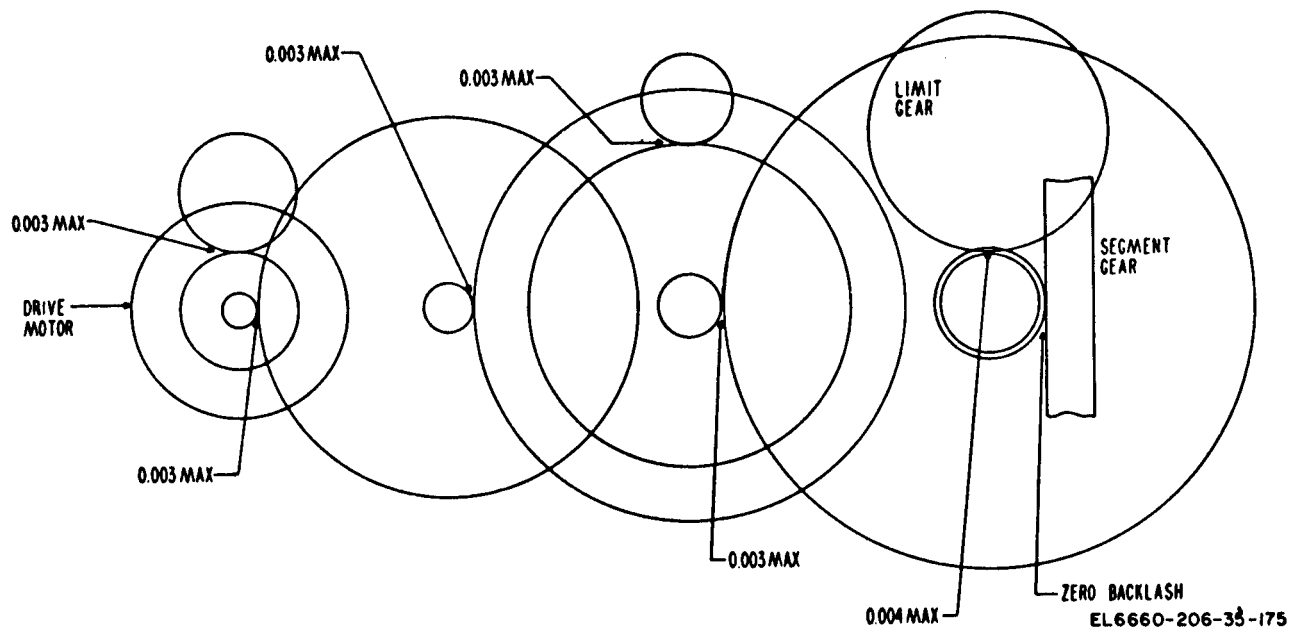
Elevation drive assembly backlash tolerances.
